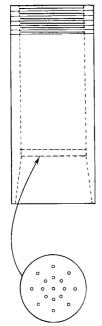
Spray Nozzle with Seventeen 0.02-in. (0.51-mm) Holes
